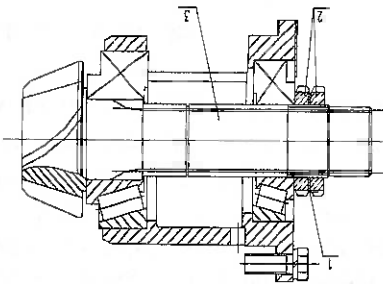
Adjustment for spiral bevel gear of main drive
